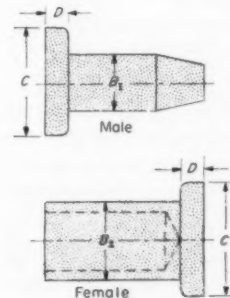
Compression rivets, developed for cutlery. Nominal dimensions are given in Table 2.
